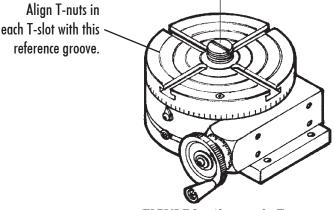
Aligning the T-nuts prior to installation of the plate.
